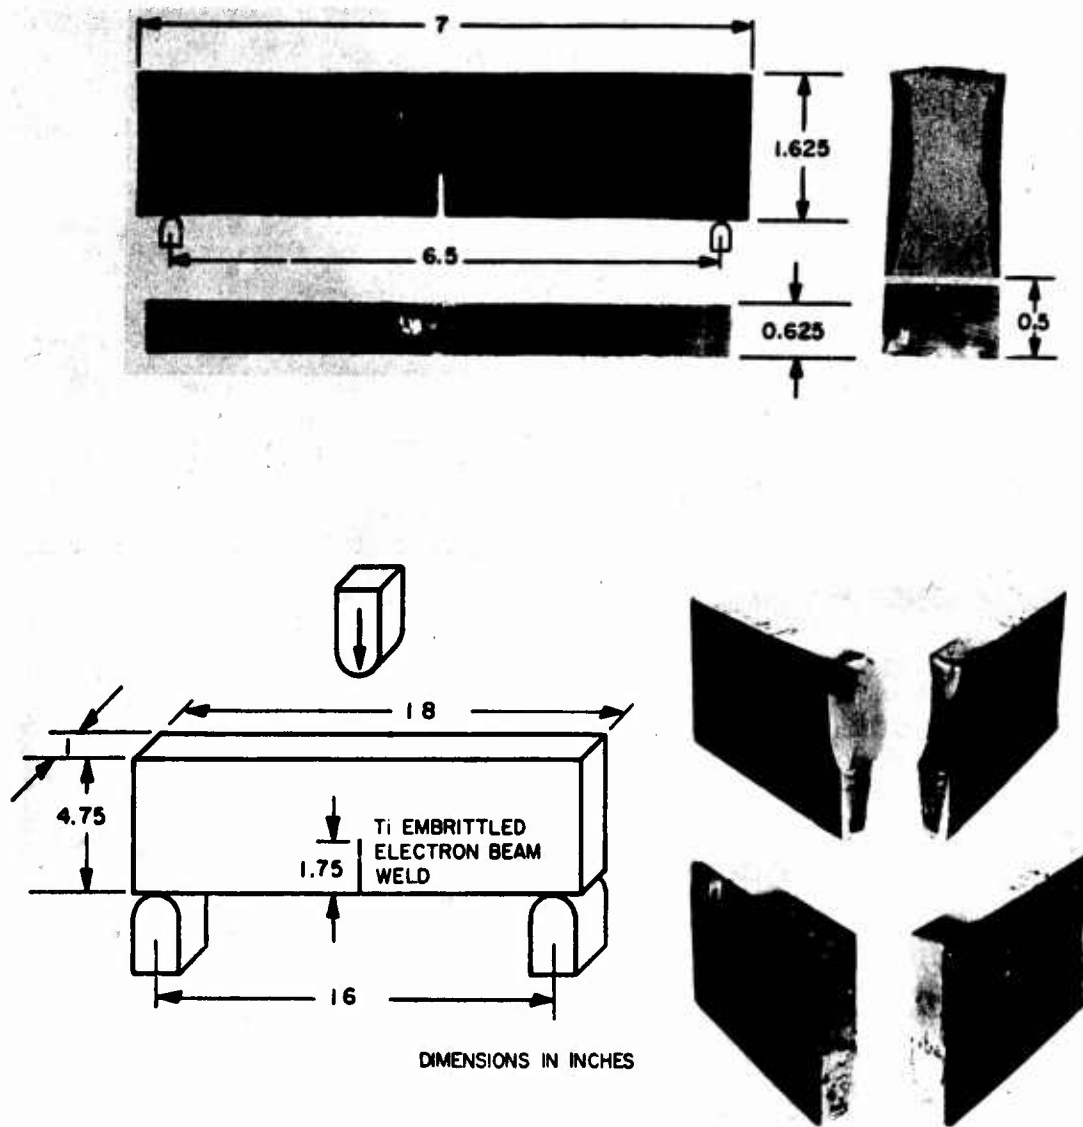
Features of 5/8-in. and 1-in. DT test specimens. The 5/8-in. DT specimen (top) features a machine slit, with a knife-edge-sharpened notch tip. The 1-in. DT specimen (bottom) features the brittle electron beam weld, which is also used for the 5/8-in. DT, as desired. The broken halves of the 1-in. DT specimens illustrate brittle and ductile type fractures.
